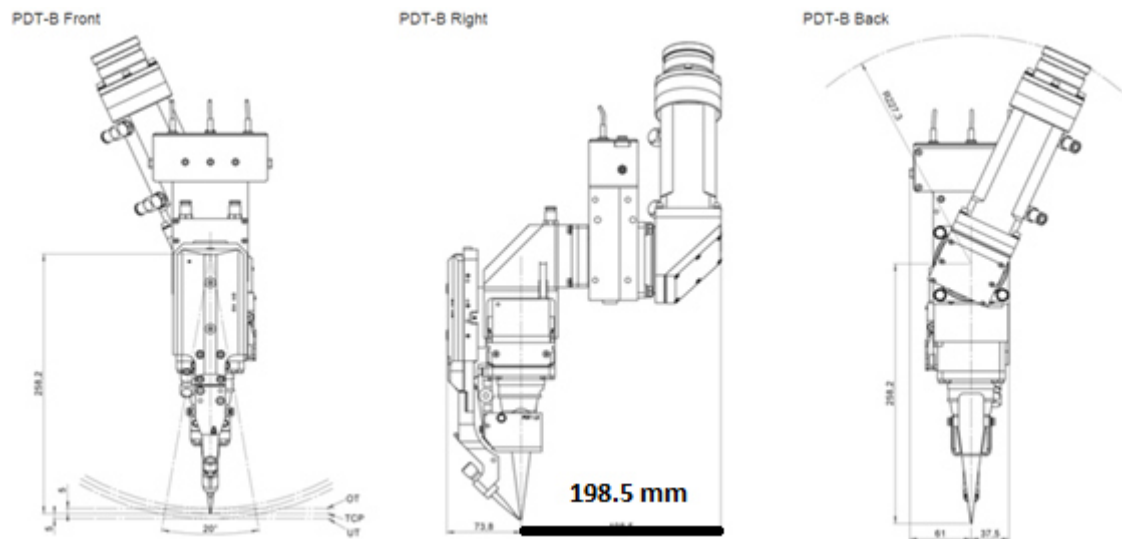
Highyag processing head and seam tracker system showing dimensions [24].
